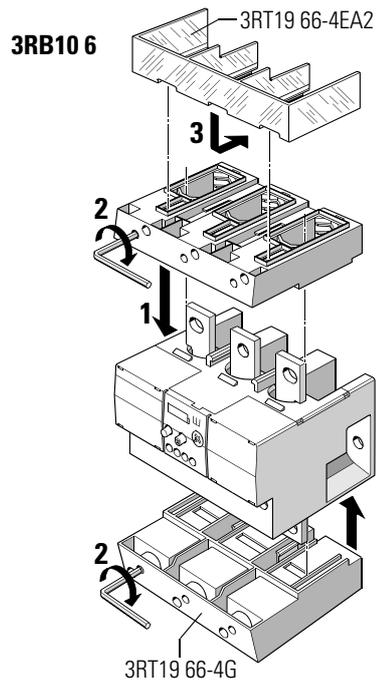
The panel mounting of the 3RB10 electronic overload relay (S10/S12)
